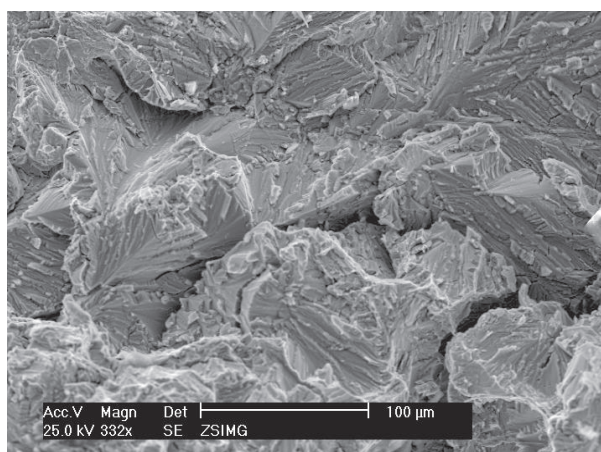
Fracture surface of "I" welded specimen after SSR test in boiling MgCl_2 solution at 125°C
